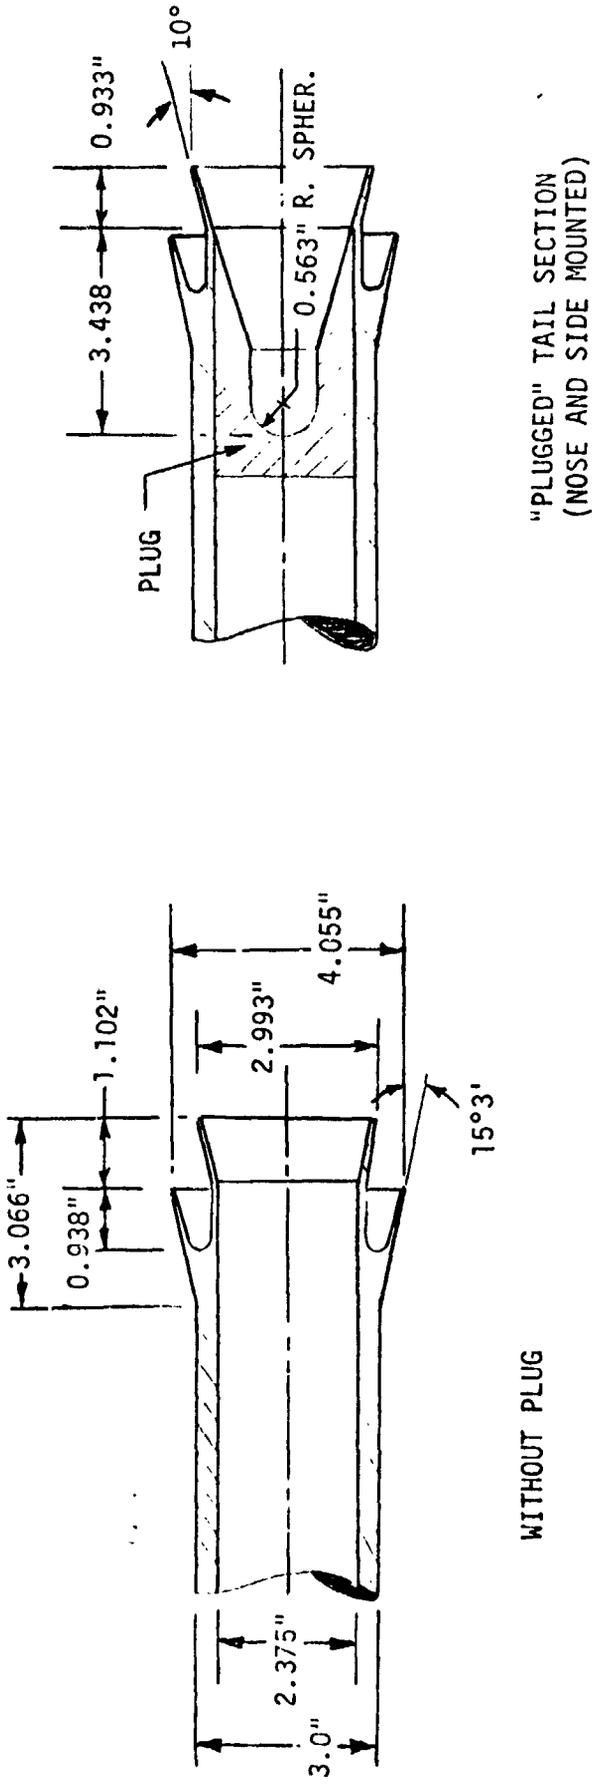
DETAILS OF SRB MODEL TAIL SECTION
